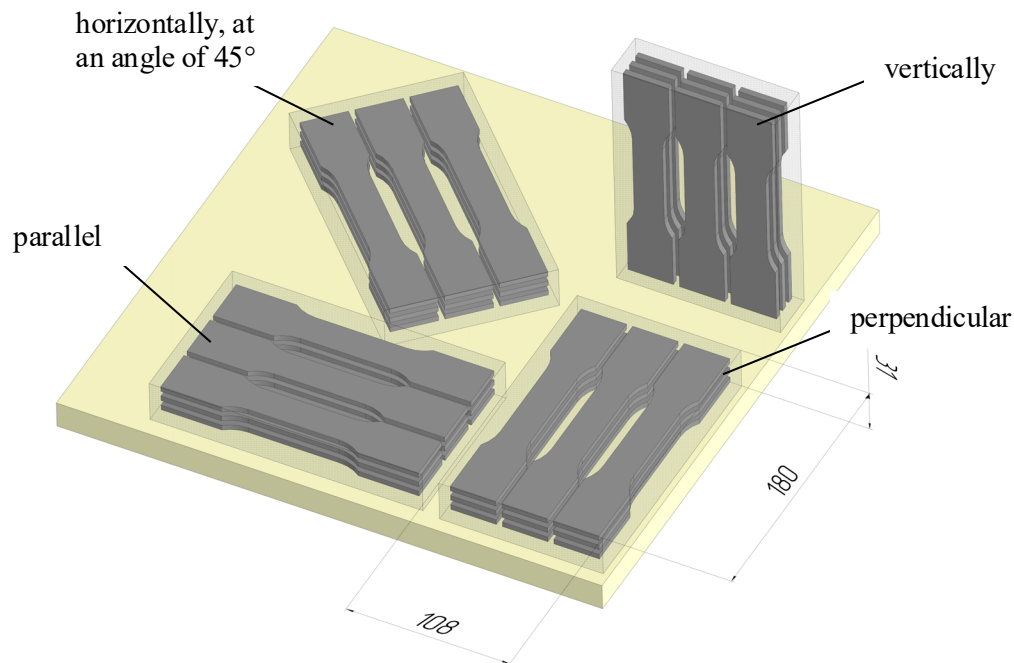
Schematic representation of synthesized samples arrangement on the substrate (welding torch direction consistent for all samples)
